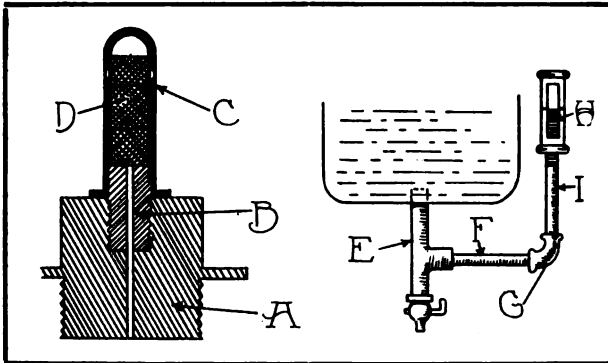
A, Device for Reducing Pressure in Differential Housing; E, Oil Gauge for Old Type Motor Crank Cases.
